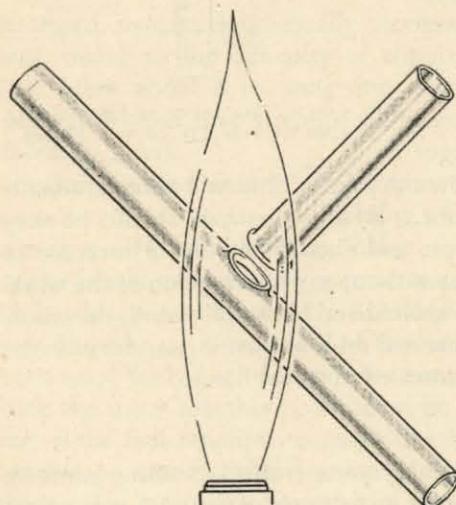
THE FLAME PLAYING ON THE EDGES OF THE HOLE AND ON THE SIDE FLANGED TUBE
